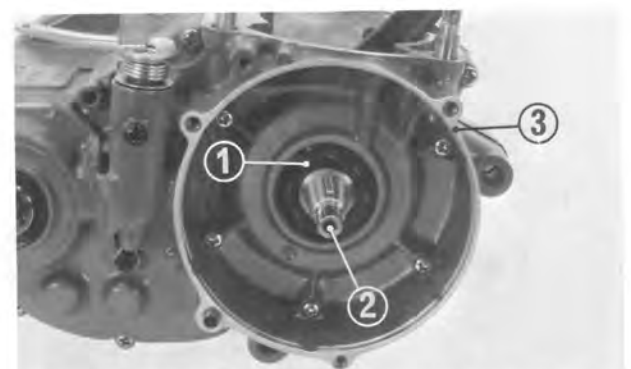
(1) Oil seal (2) Countershaft (3) Right crankcase
